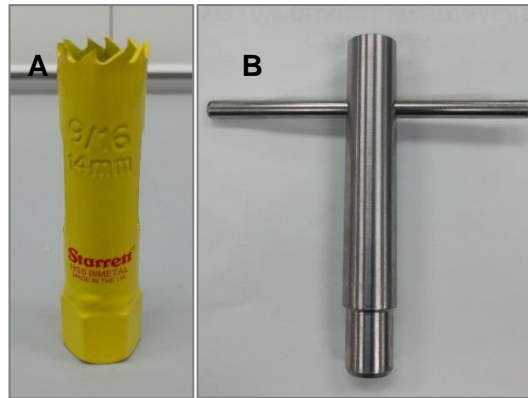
Custom made jig used to cut osteochondral plates to a depth of 7 mm.
